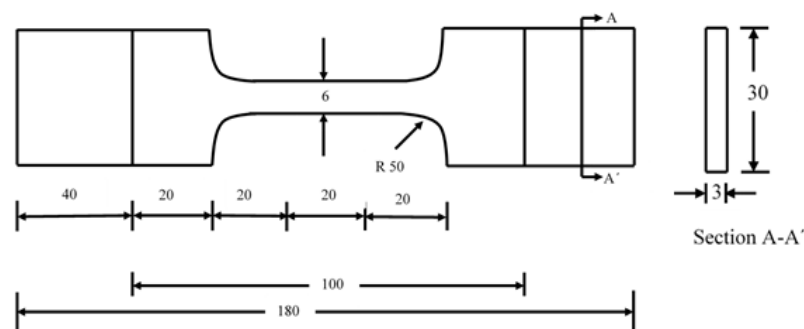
Coupon specimen dimensions (All dimensions are in mm)
